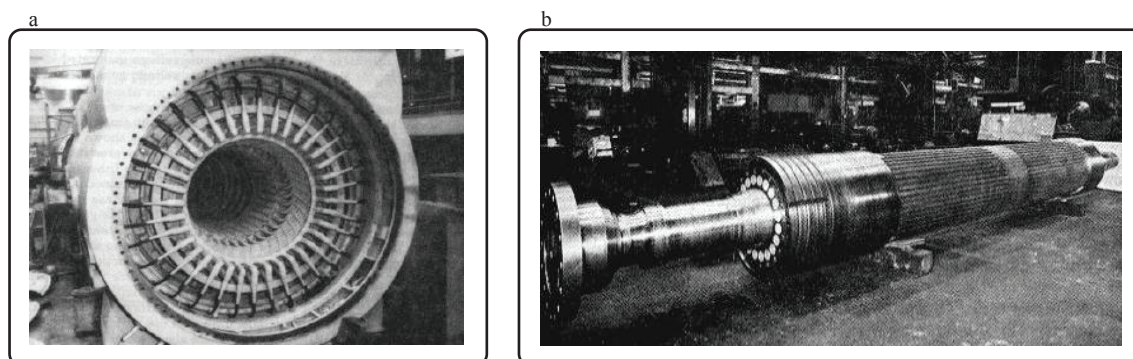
parts of synchronous generator (a) Stator; (b) Rotor [2].
